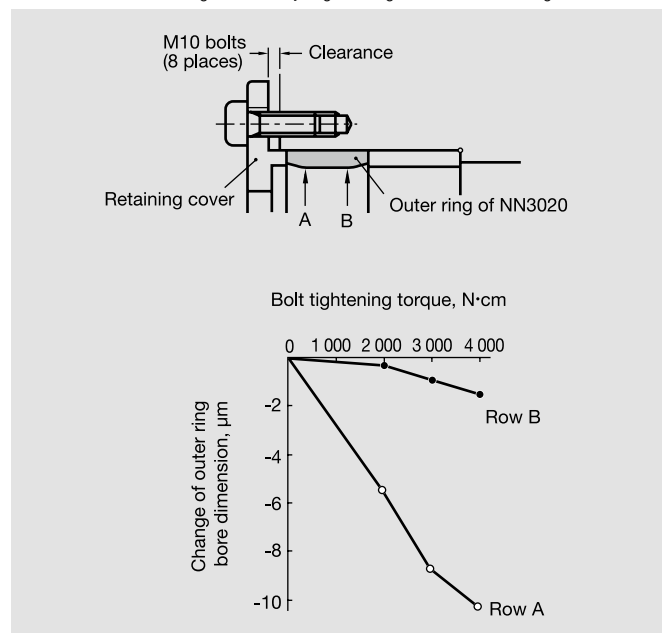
Example of Outer Ring Deformation of a Double-Row Cylindrical Roller Bearing Caused by Tightening Force of Retaining Cover
